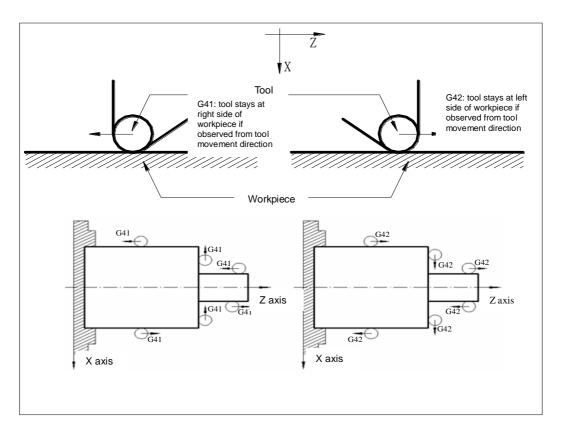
Tool Nose Radius Compensation in Front Tool Apron Coordination System
